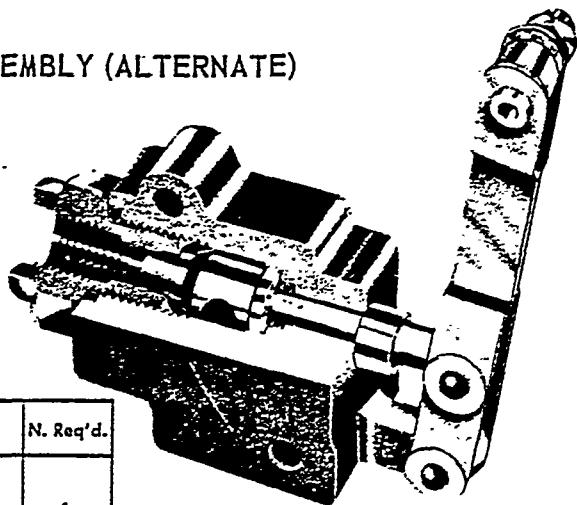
PARKING BRAKE VALVE ASSEMBLY (ALTERNATE)
